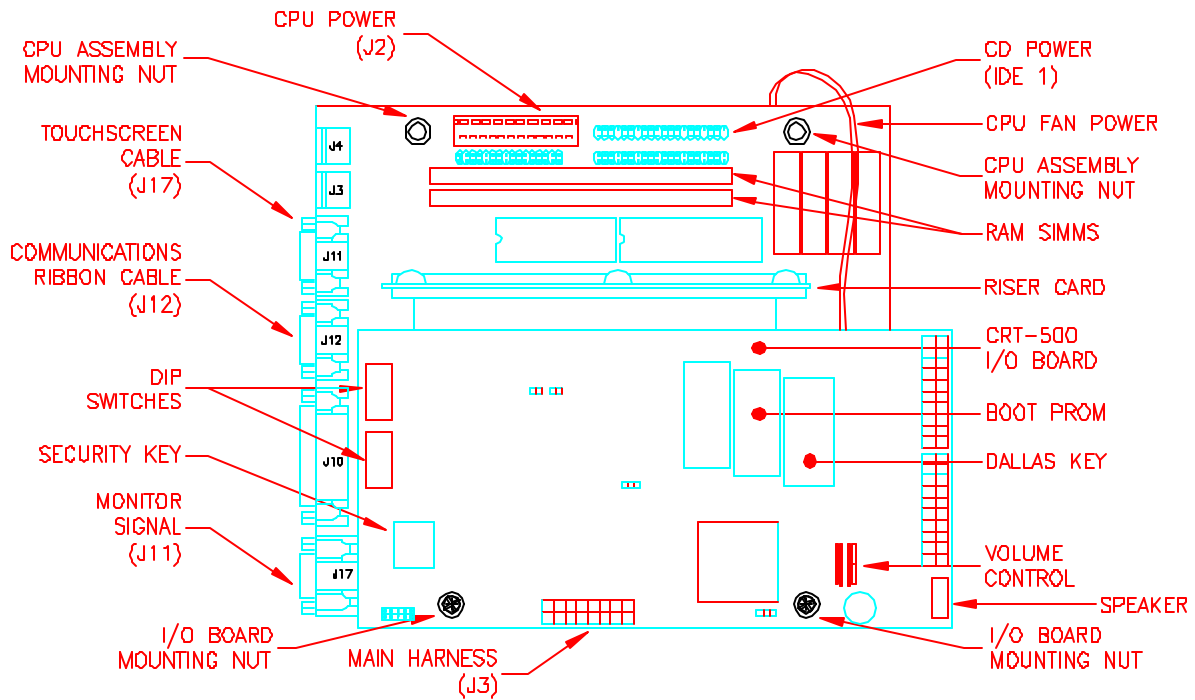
TELCO MOTHERBOARD AND I/O BOARD ASSEMBLY
